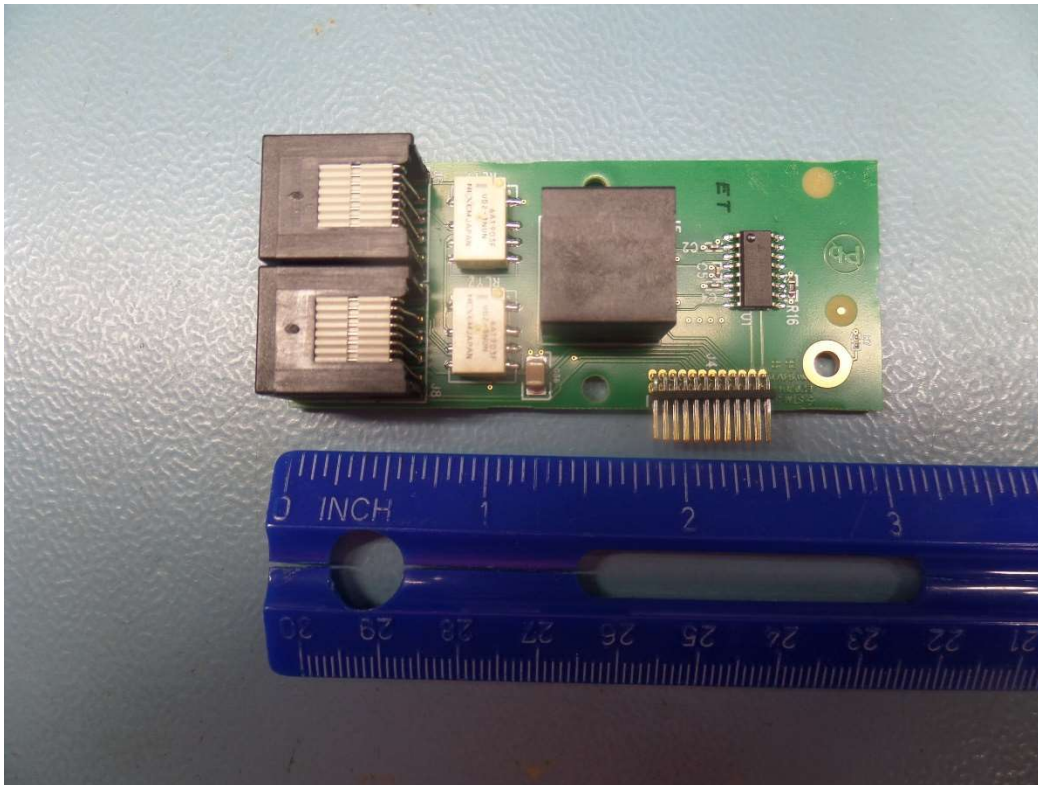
Neo Remote Electronics Enclosure A1203 I/O module top side
